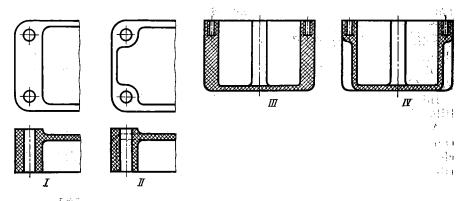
Eliminating local heavy sections. Improper (I, III) and proper (II, IV) design
